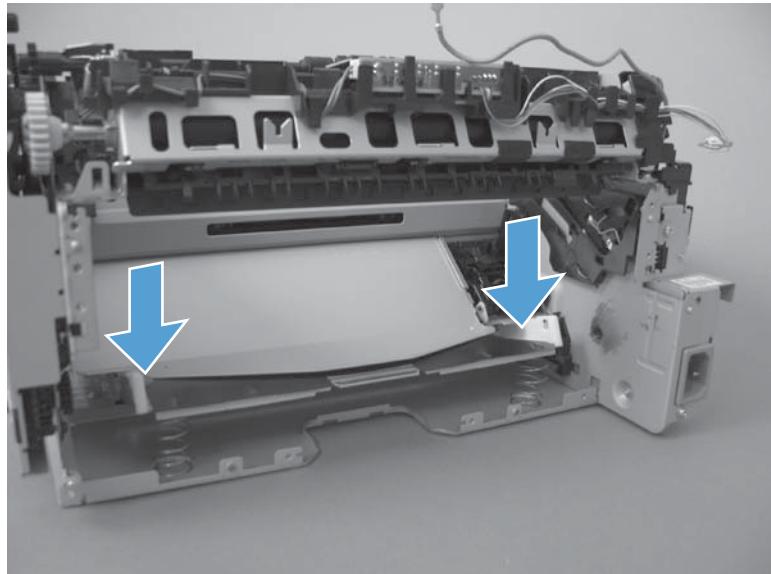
Reinstall the pickup assembly (2 of 4; incorrect ground spring position)
